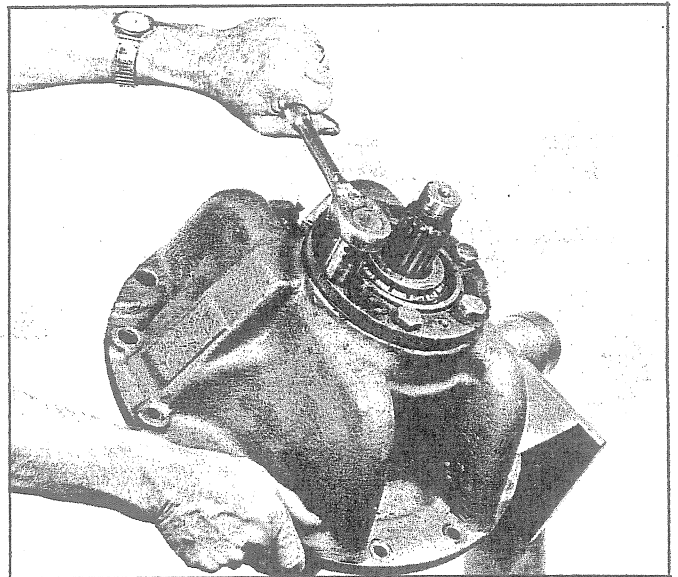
Positioning Pinion Shaft Assembly into Housing
